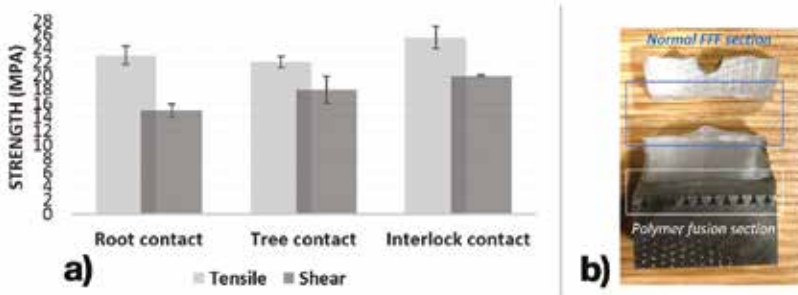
(a) Experimental results of shear and tensile tests and (b) the breakage of the specimens.
